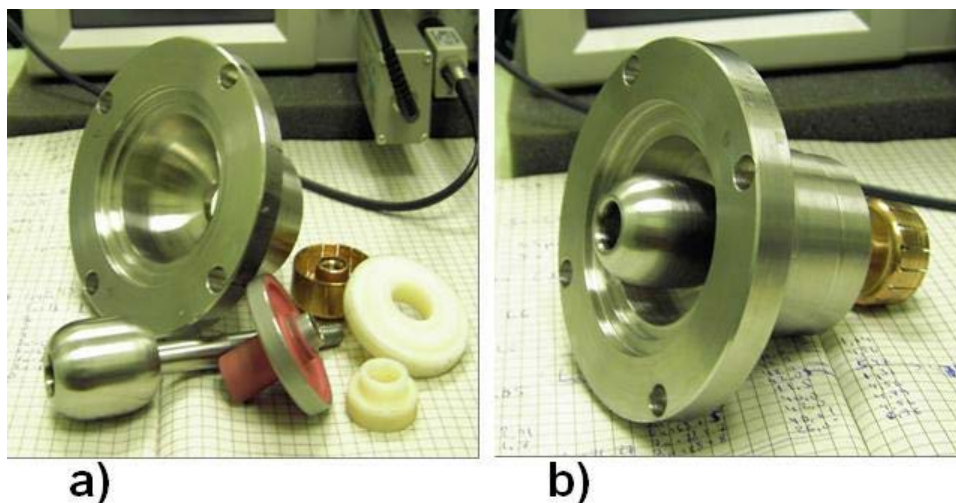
Photo of new stainless steel chamber details - a); and the new chamber assembled - b).
